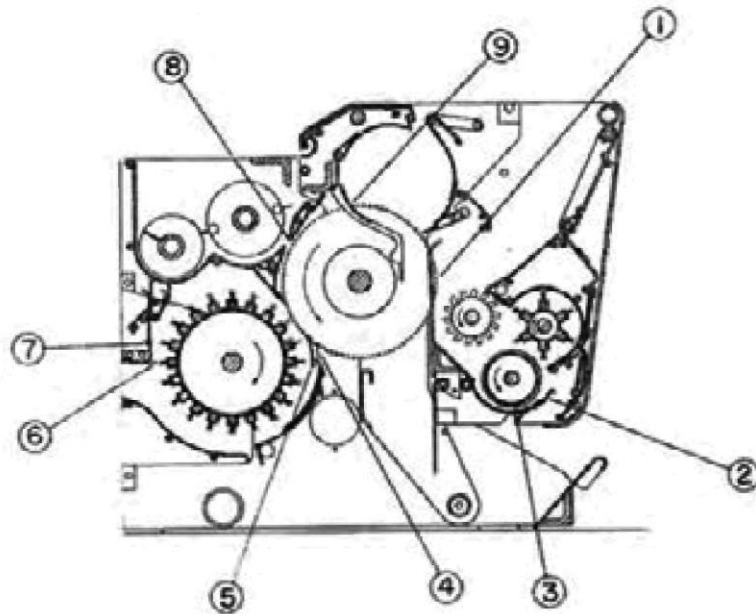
Continental 79-saw Comet and 119-saw Comet Supreme Brush-type Gins.
